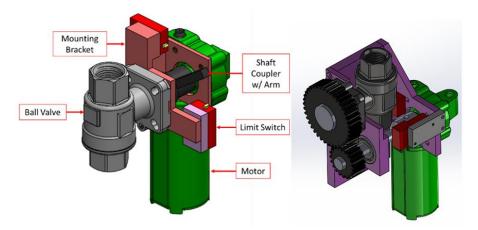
Kismet valve assemblies. Shown on the left is the assembly for the vent valve, and on the right is the injector valve assembly.
